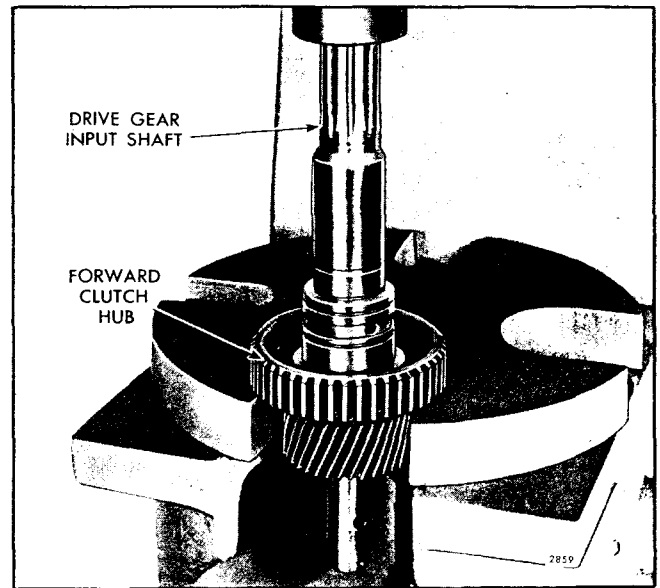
Removing Forward Clutch Hub from Drive Gear Input Shaft
